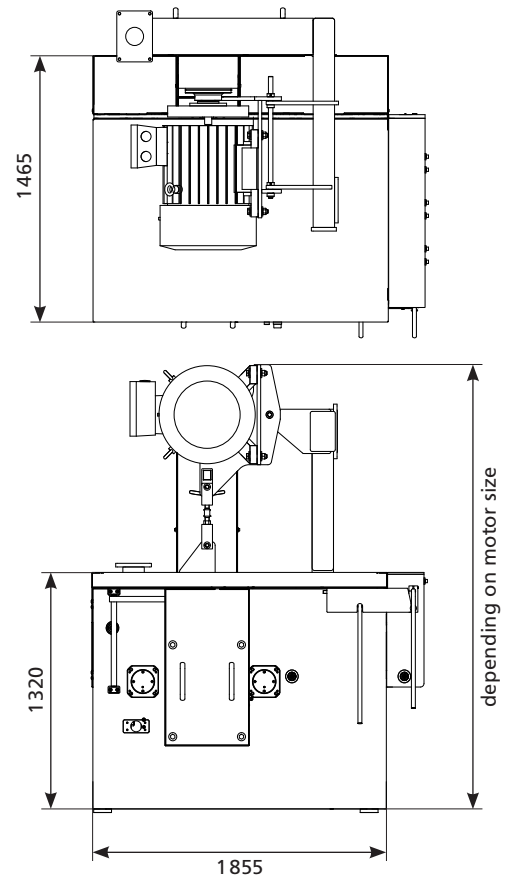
Dimensions (mm) of a KME3-1016 with overhead motor, right-hand design
